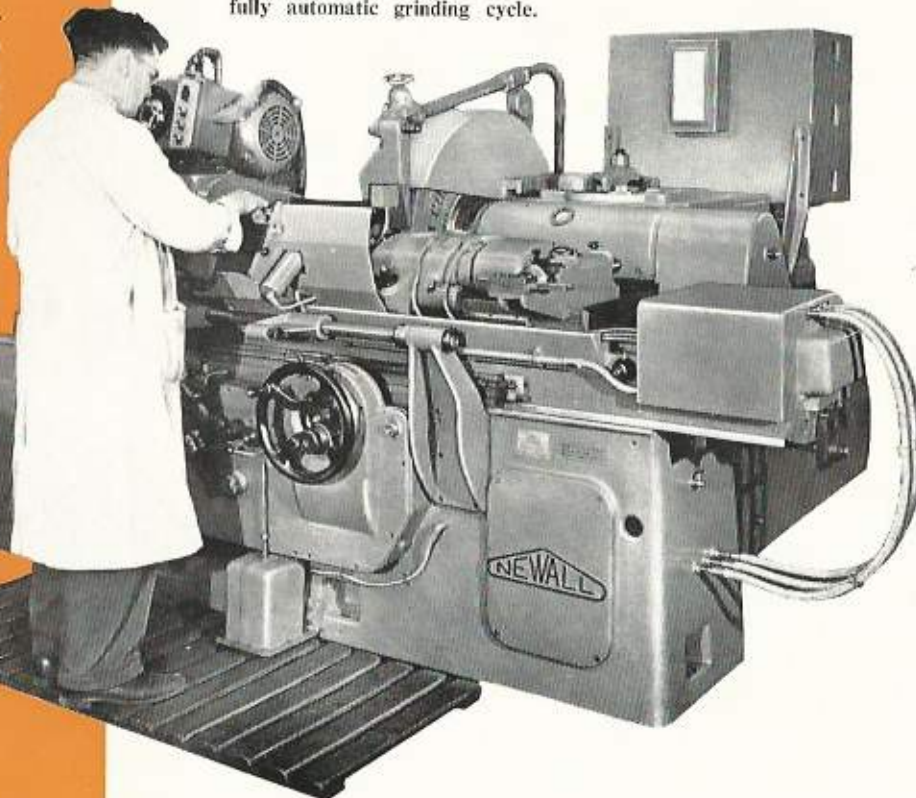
The machine equipped with hopper feed mechanism and fully automatic grinding cycle.
